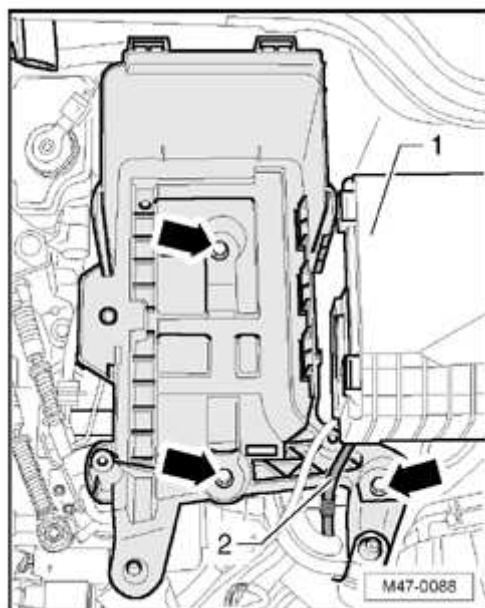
Identifying Cover Of E-Box, Wire & Bolts
